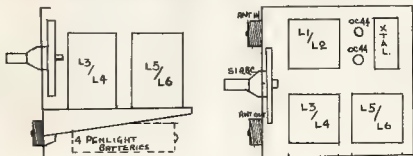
and 3.—Suggested layout drawn for a 3" square chassis, to fit a 3" cube box.
